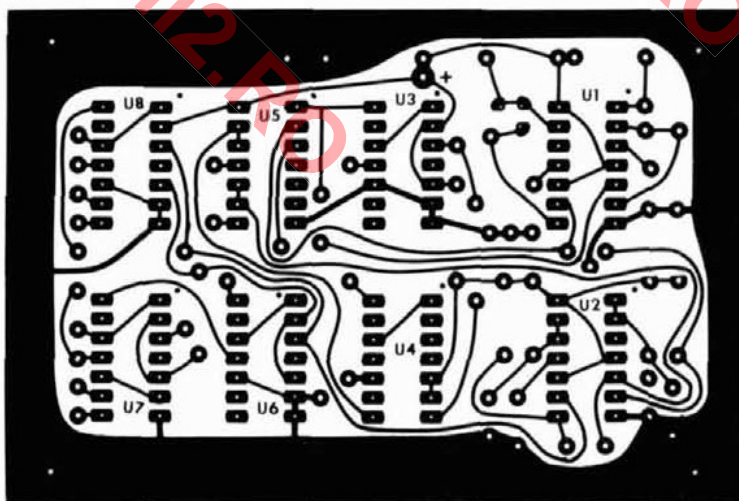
Full-size printed-circuit layout for the Accu-Keyer speed readout. Parts layout is shown in fig. 4.
